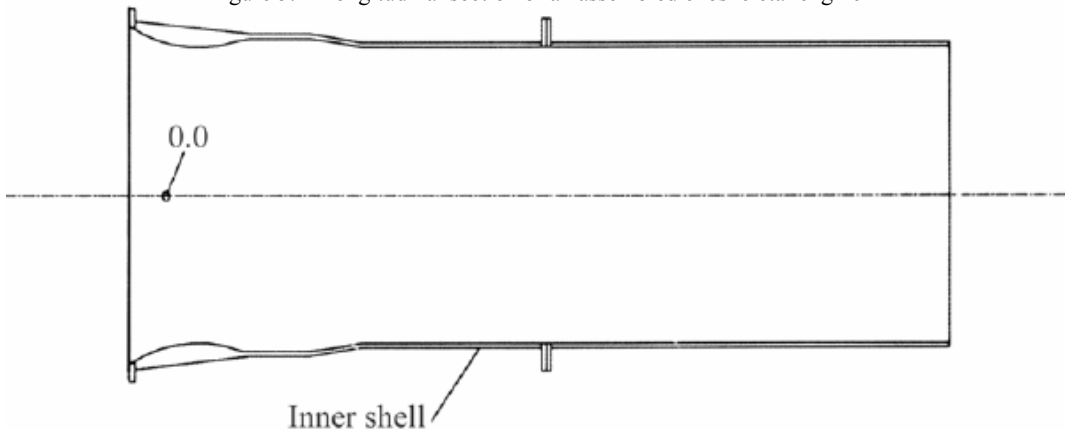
Longitudinal section of the exoskeletal engine inner shell
